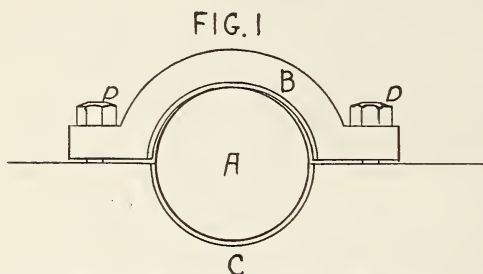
A=Crank Shaft; B=Cap Bearing; C=Crank Case Bearing. By tightening nuts D, cap bearing can be sprung down tight around shaft A, but lower bearing C cannot be sprung, due to the fact that it is rigid.
